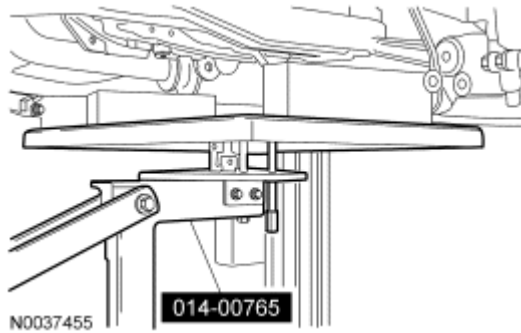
Positioning Special Tool (014-00765) Under Subframe Assembly
